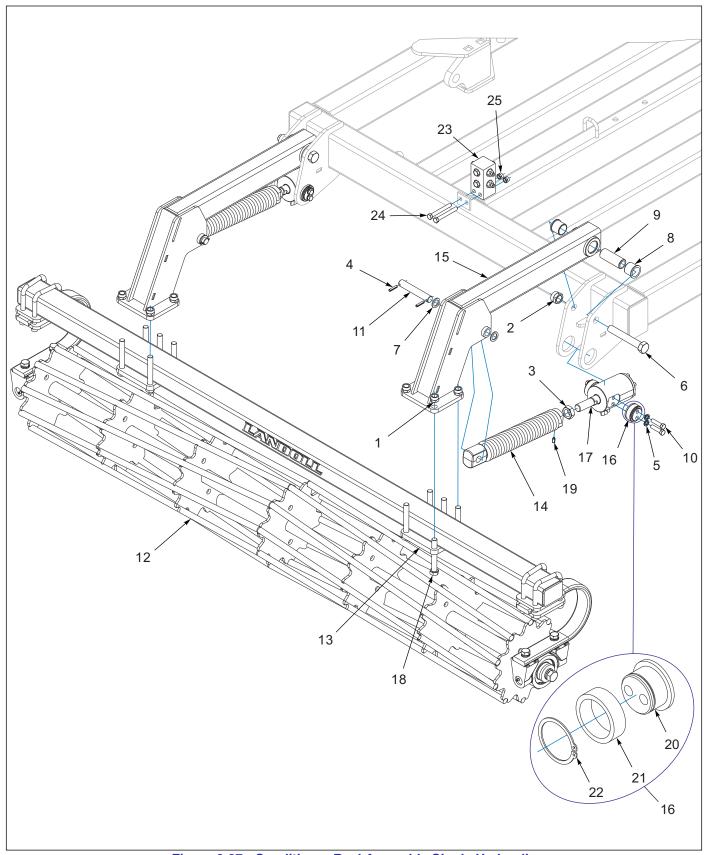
Conditioner Reel Assembly Single Hydraulic
